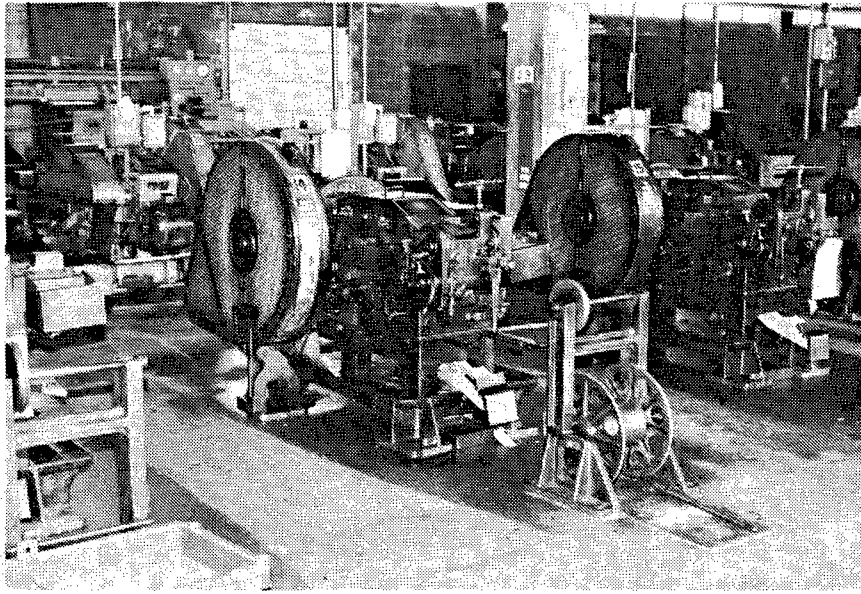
Building 111: Heading Machine for .30, .40, .50 caliber ammunition manufactured by the National Machinery Company.
